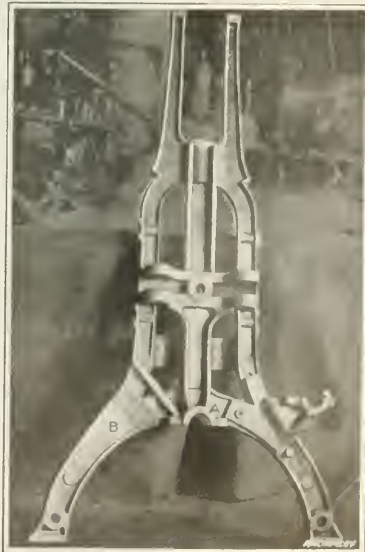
Machine Frame with Babbitted Bearing close to Weld
